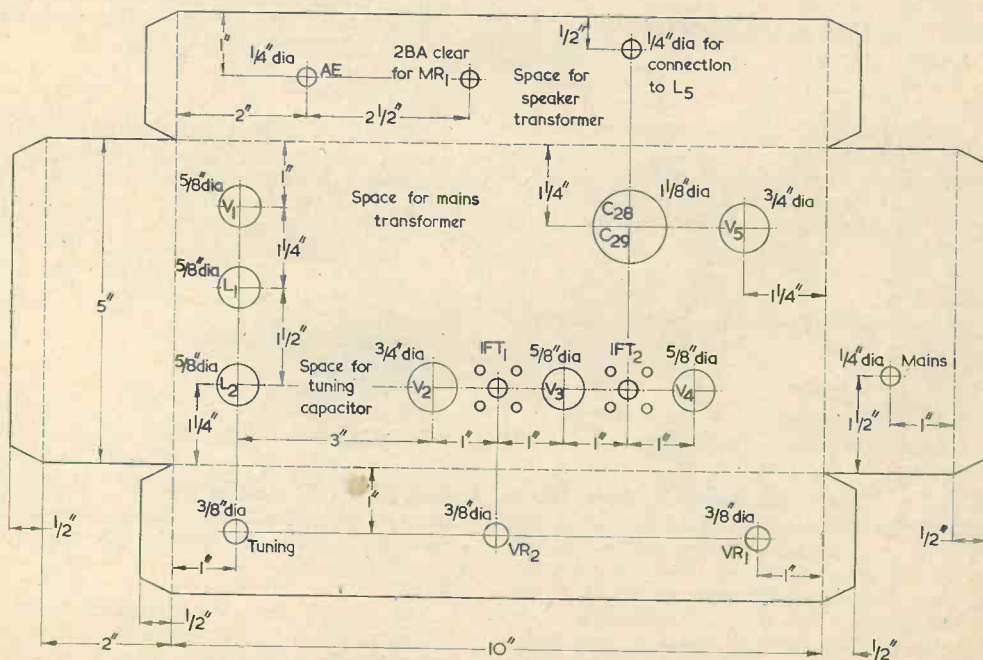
Top view of chassis before bending, showing the principal holes which have to be made
